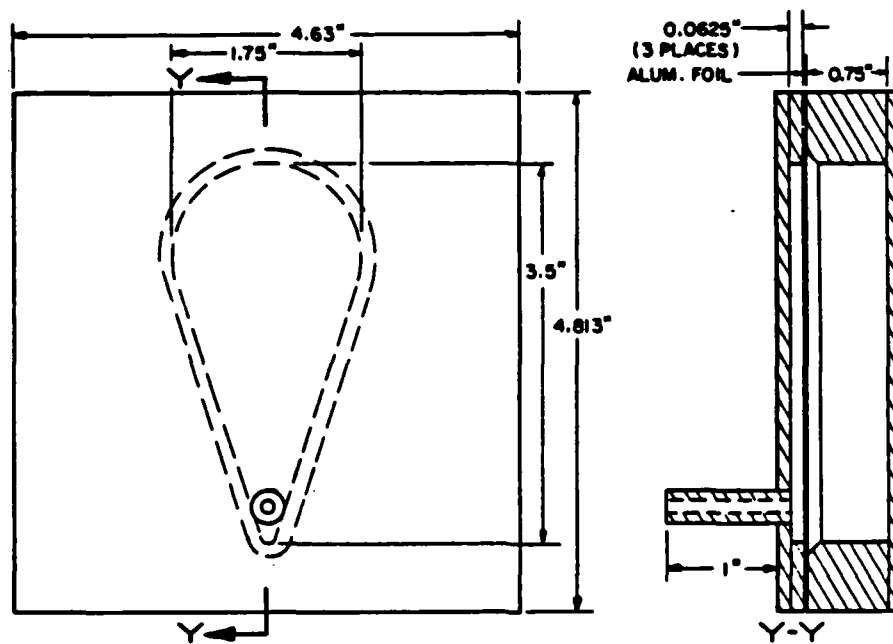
Plan and end view of the Quasi-Static Diaphragm Pressure Gage (QS-DPG)
